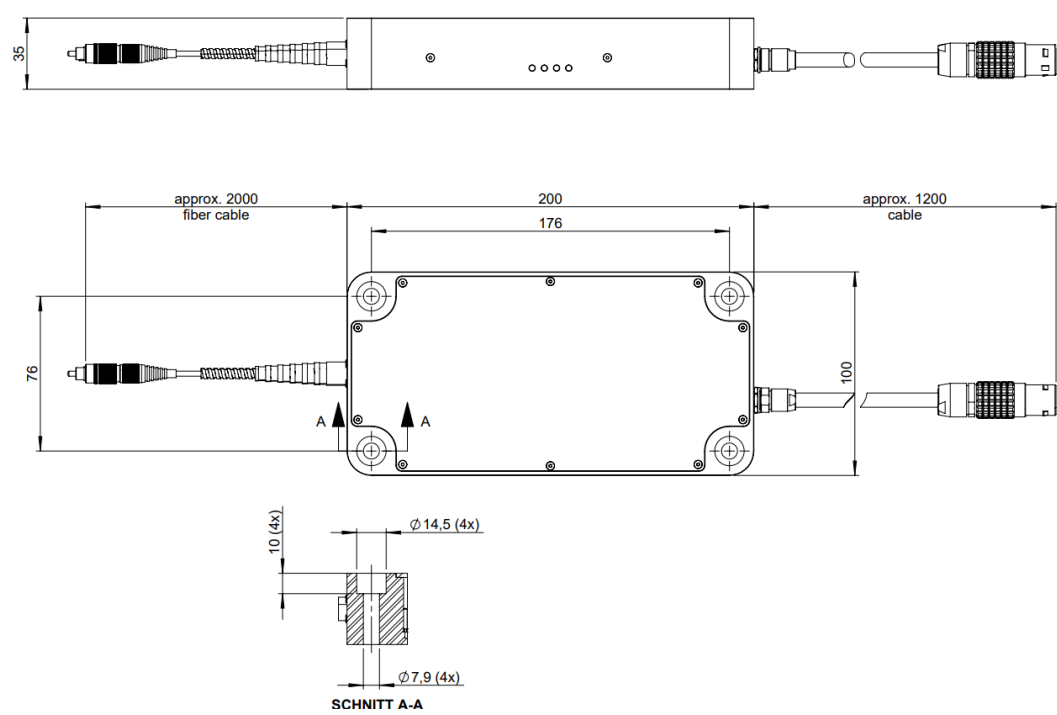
Dimensions of an LDH-FA laser head with flat housing and fiber
